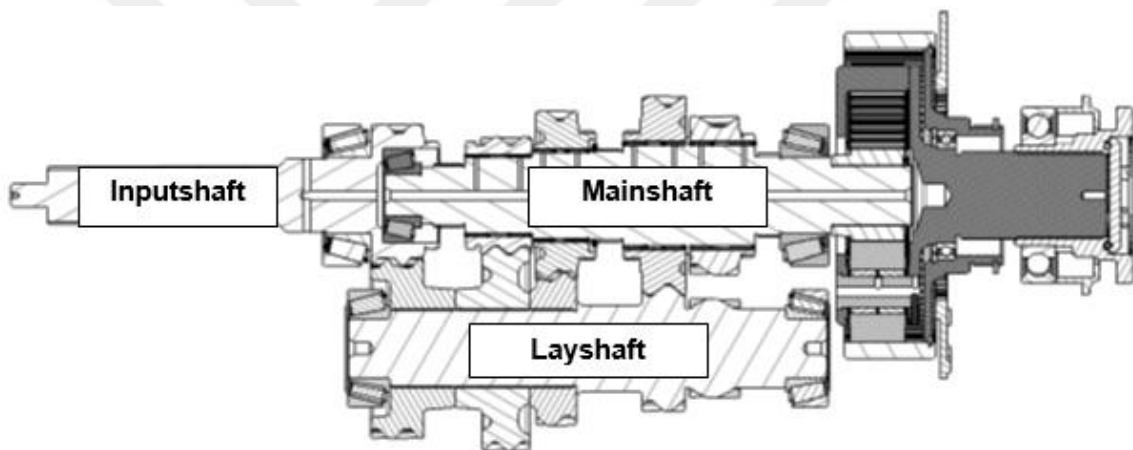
Section view of 8+1 MT gear train (courtesy of the company)
